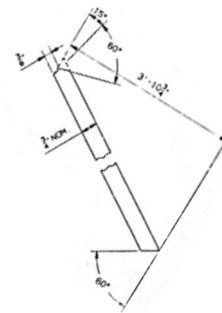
Millstone Unit 2 SG Primary Side Inlet/Outlet Nozzle Configuration
